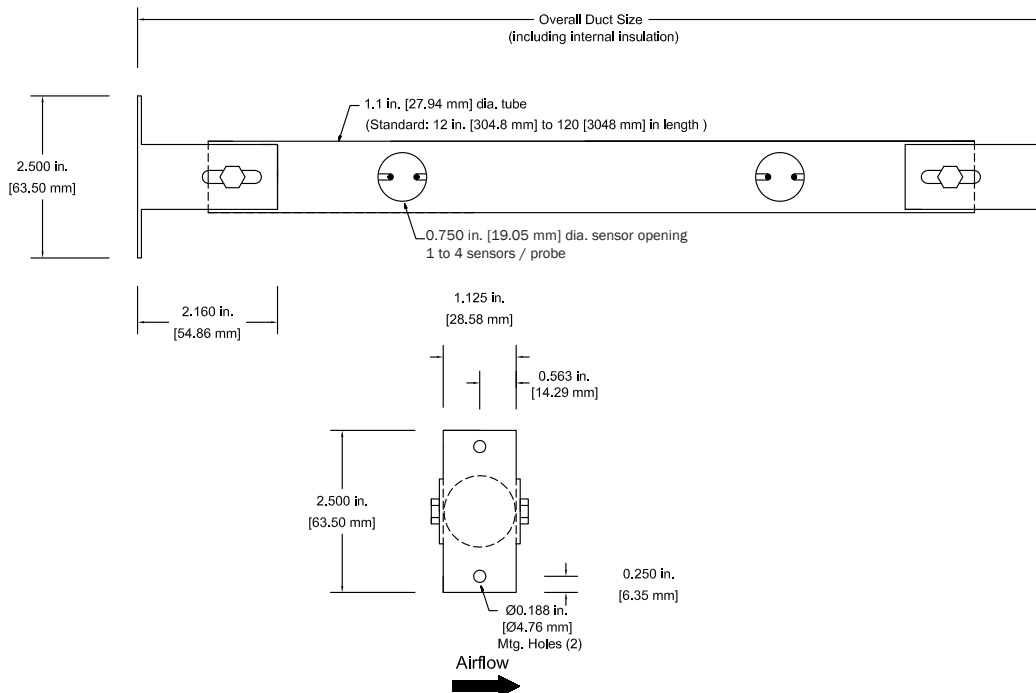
HP1/SP1 Internal Mount Probe Mechanical Dimensions
